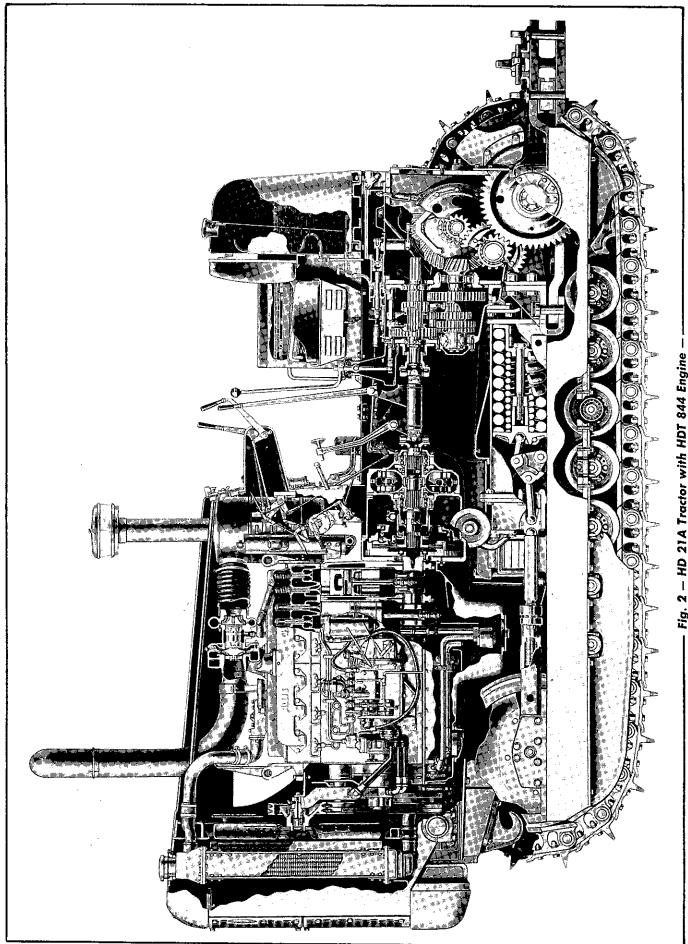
HD 21A Tractor with HDT 844 Engine Sectional View
